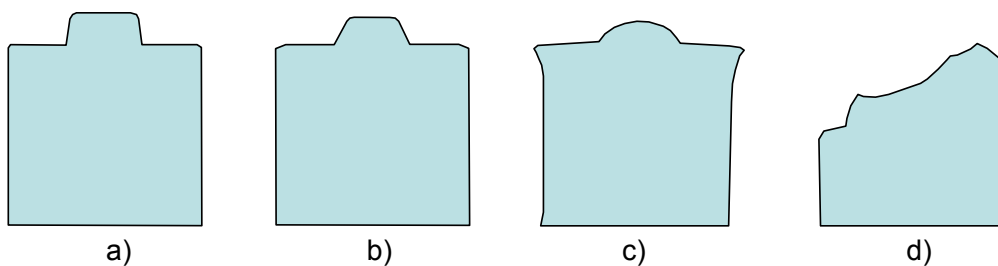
Schematic illustration of tool wear and failure mechanism a) Original tool geometry b) Worn tool geometry c) Deformation of shoulder and pin d) Fracture
